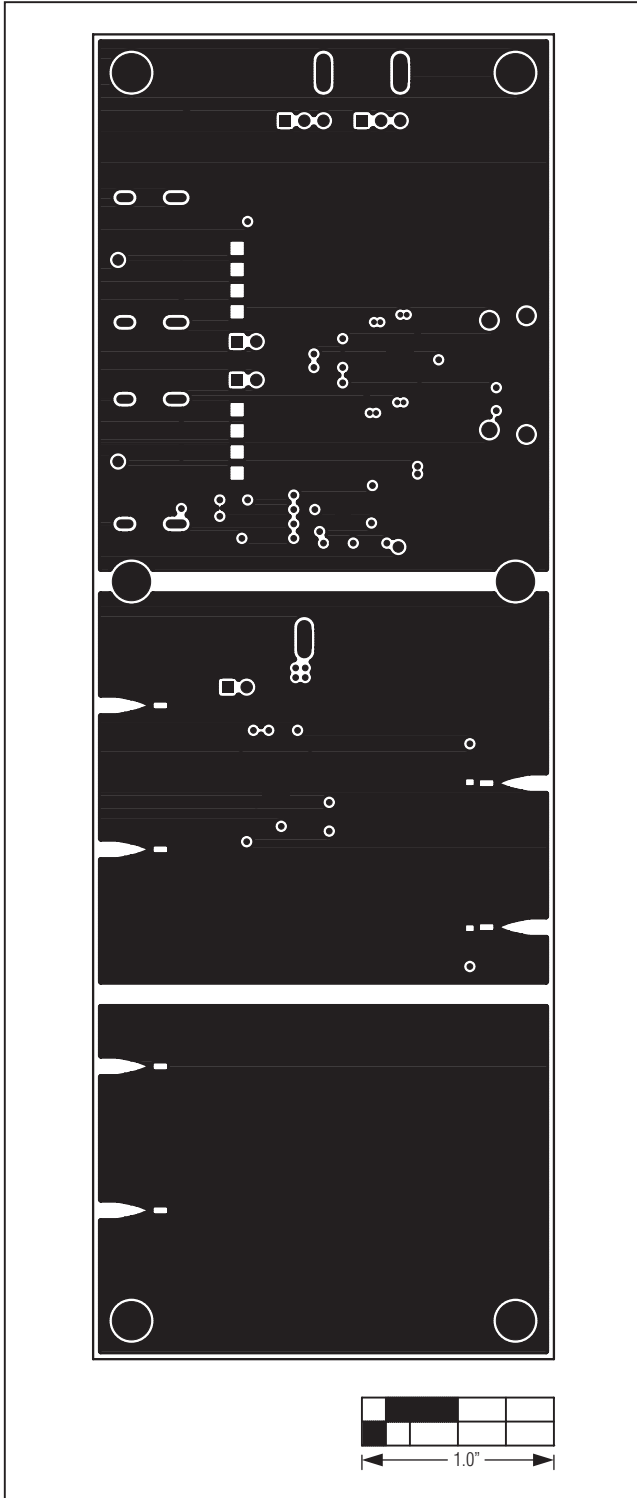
MAX14886 EV Kit PCB Layout—Inner Layer 2
